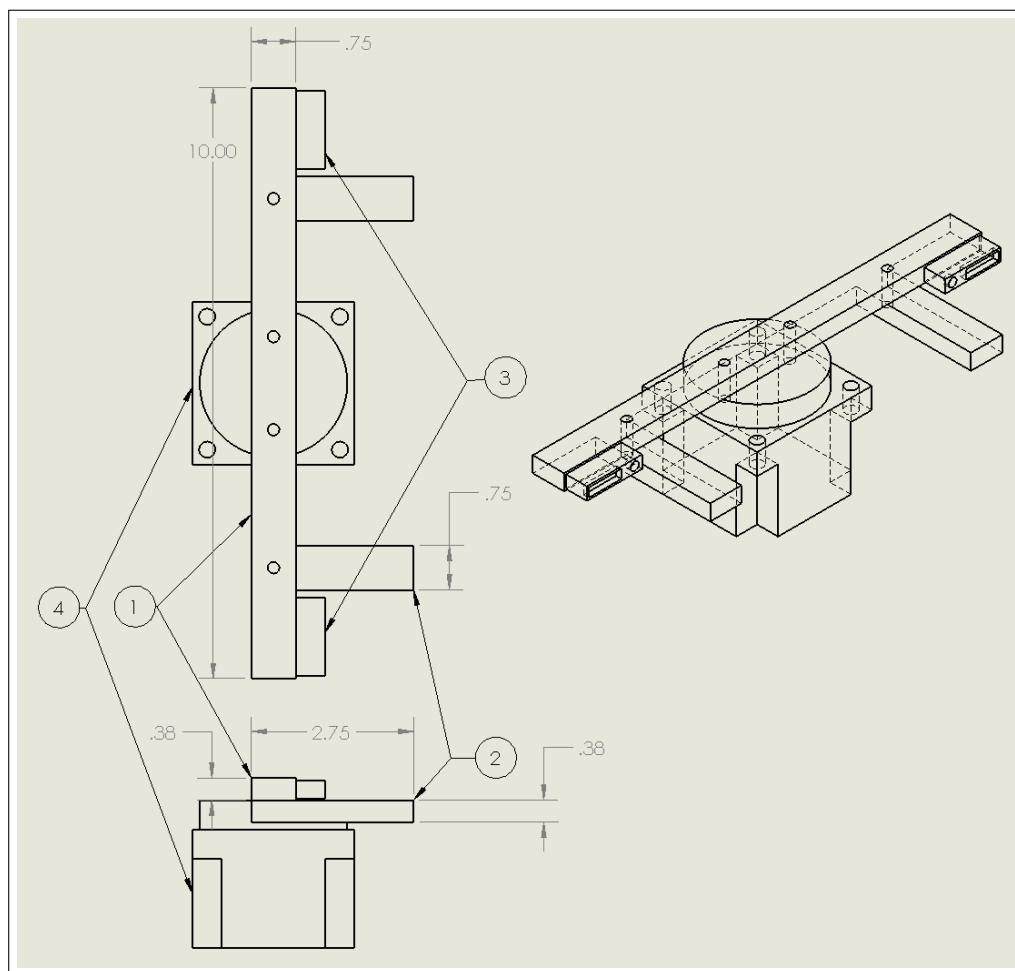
Fixture Design Concept Drawing: ① Fixture Structure - 10" x 3/4" x 3/8" Aluminum; ② Contacts - 2.75" x 3/4" x 3/8" Aluminum; ③ Optical Distance Sensors; ④ Harmonic Drive Servo Motor FHA-8C-100-US200-E (A-Axis). UNLESS OTHERWISE SPECIFIED, ALL DIMENSIONS ARE IN INCHES.
